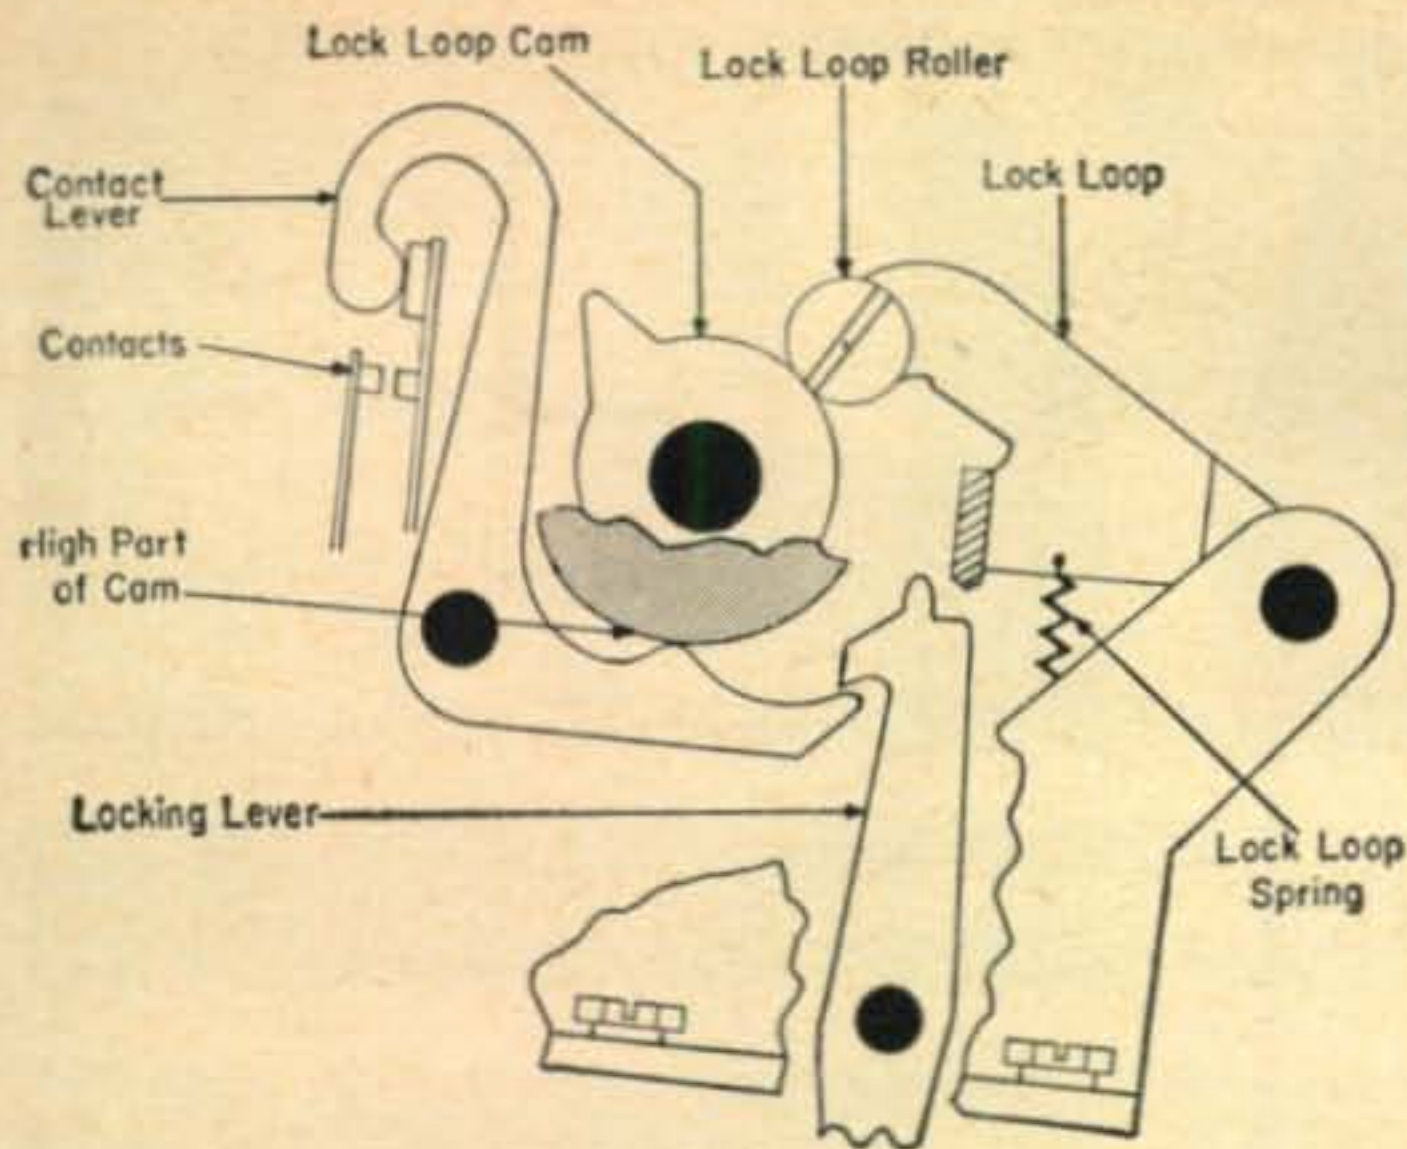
Keyboard contact and locking lever mechanism of Model 15 Teletype machine.
